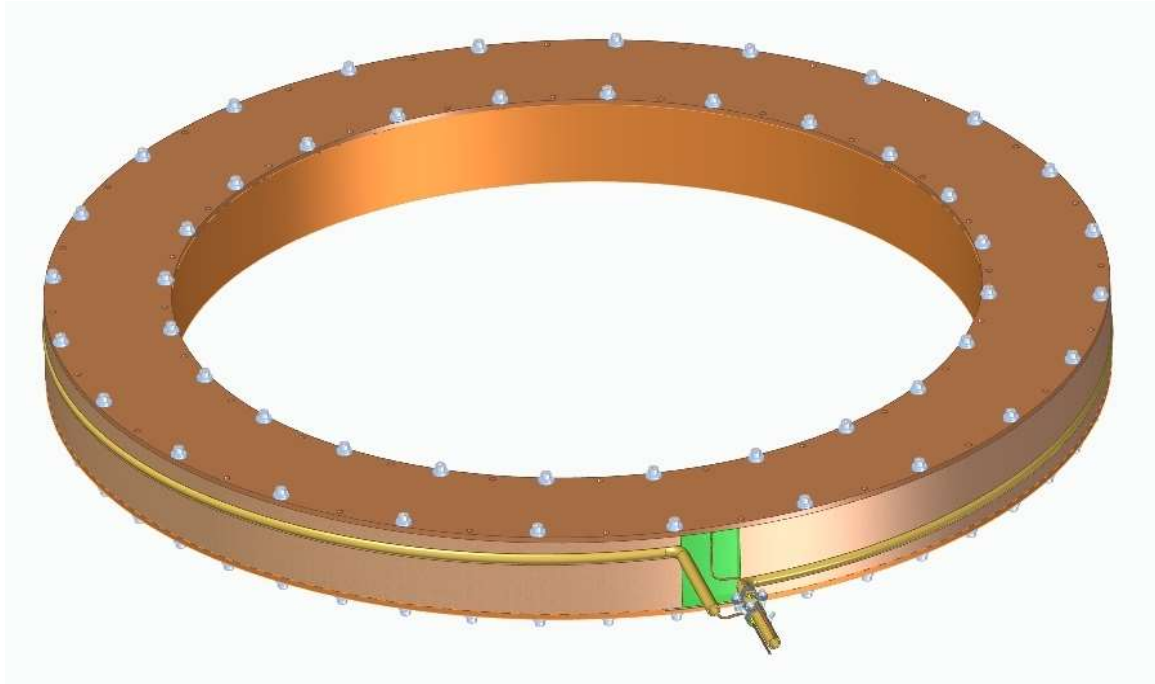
The view of the coil after impregnations and assembling. The copper case is bolted.
